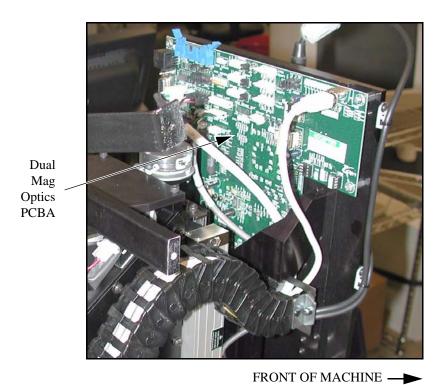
Location of the Dual Mag Optics PCBA (Front Cover Removed)
